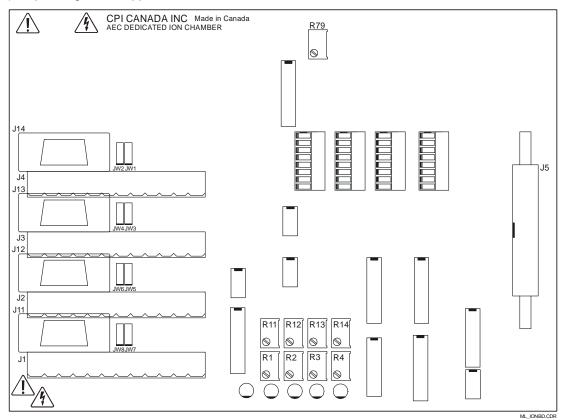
D-6: Dedicated ion chamber AEC board (assembly 734614)
